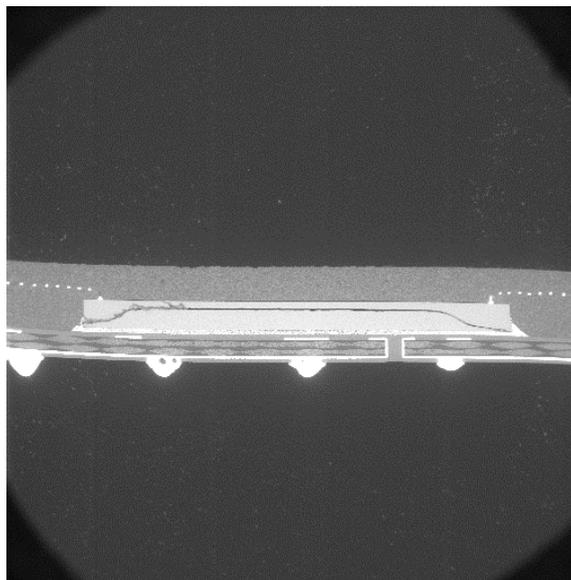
BGA section showing die crack [13X, BSE SEM image, ref. SLI-1345].
